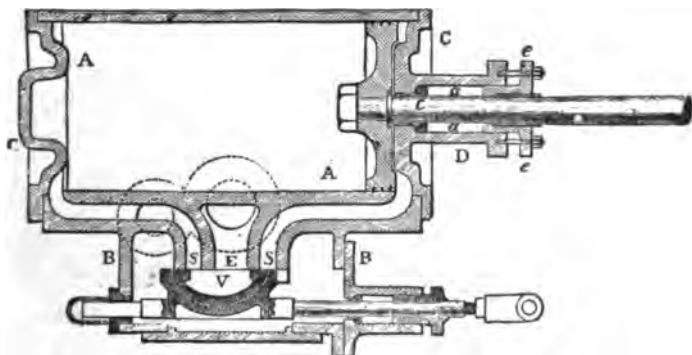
Section through a Steam Cylinder and Valve Chest, showing parts. A is the cylinder; B, the steam chest; C and C, the cylinder heads; D, the stuffing box; a and a, the packing gland; c, the piston rod; E, the exhaust port; S and S, the steam ports; V, the slide valve; e, e, the packing gland, held in place by screws in this engine.
